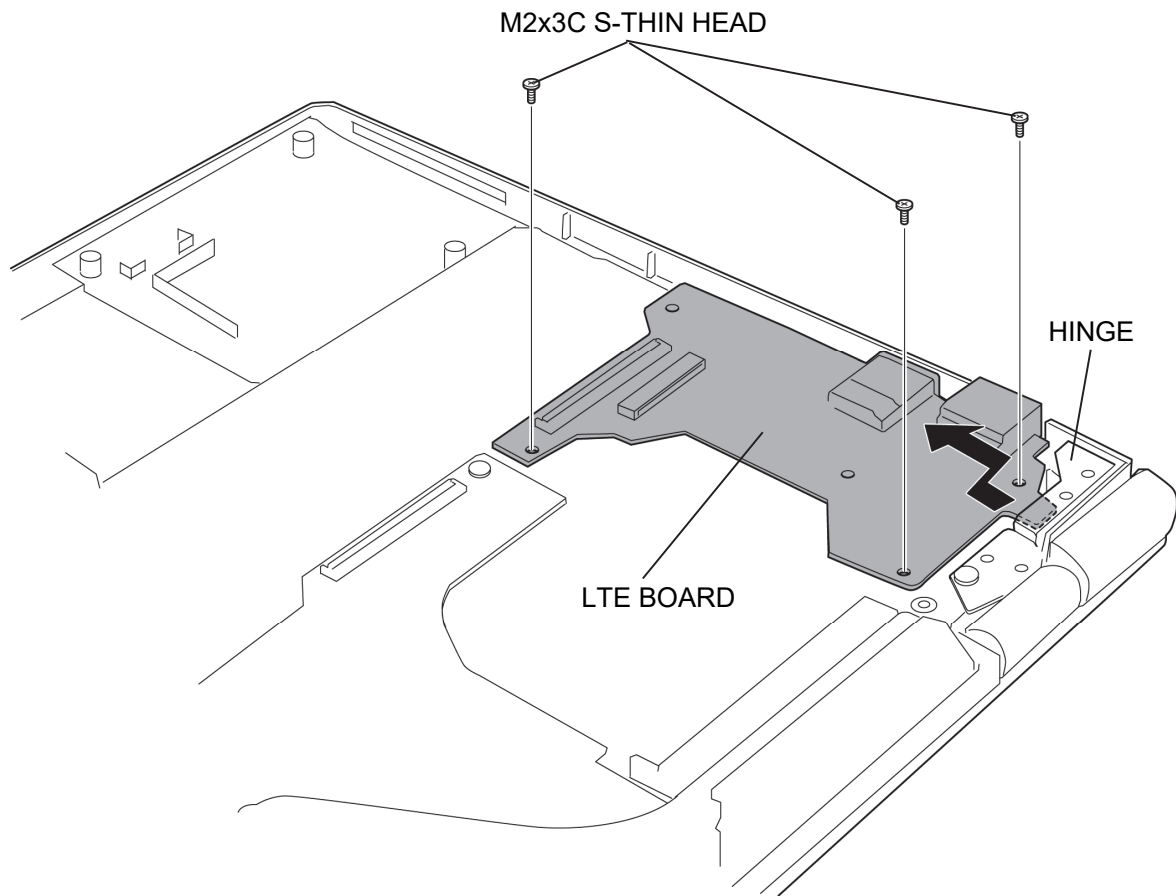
Removing the USB BOARD/LTE BOARD (3)
